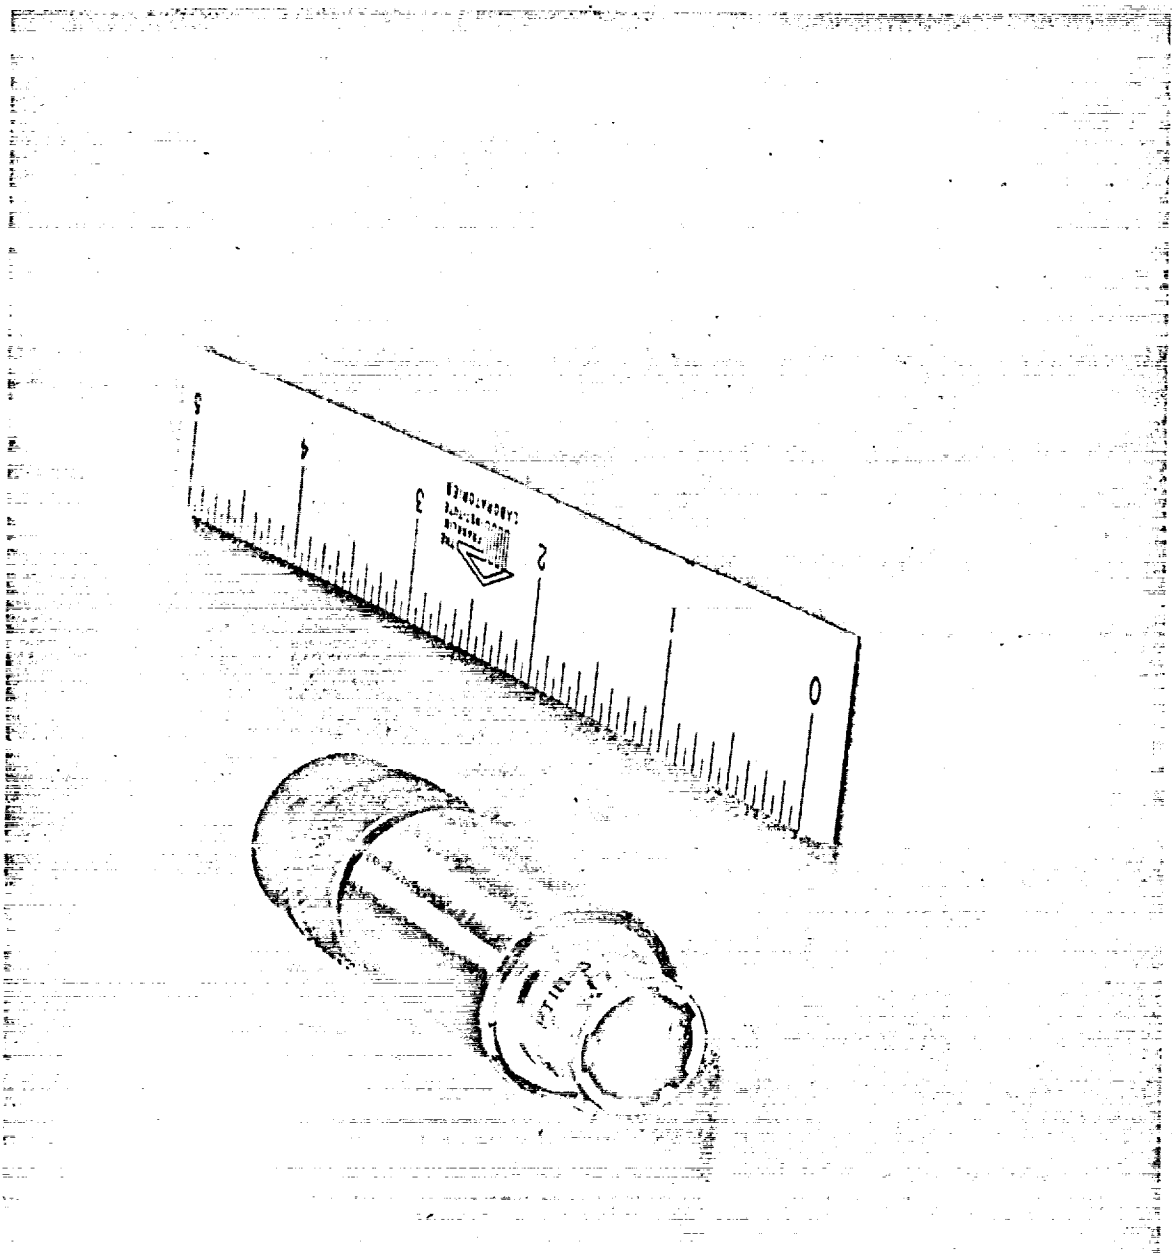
FIRL 2-PIN HYBRID FILTER
